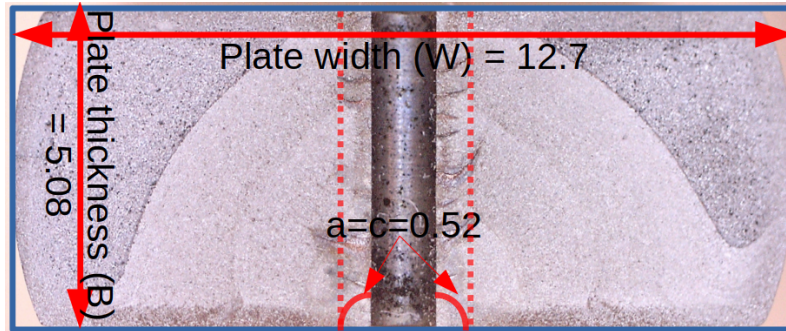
Fracture surface of the composite sample with corner flaws parameters
